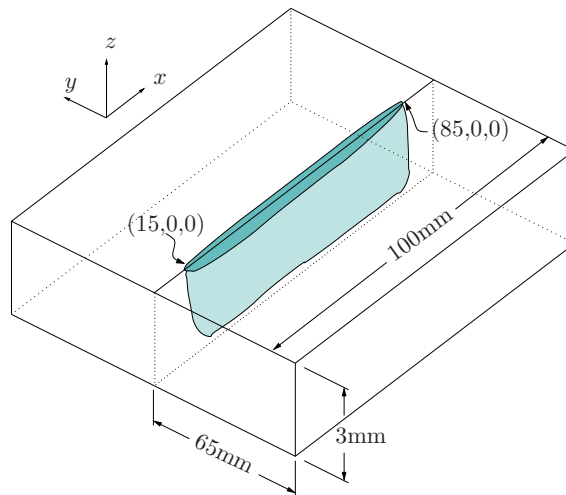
Material piece geometry with start and end points for the butt-weld.
